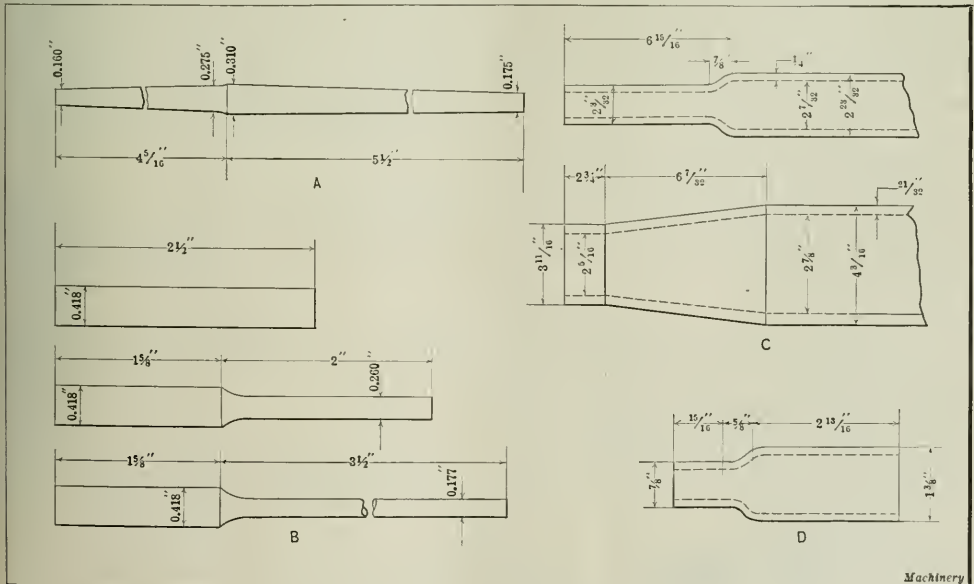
Examples of Hot-swaged Solid and Tubular Work
